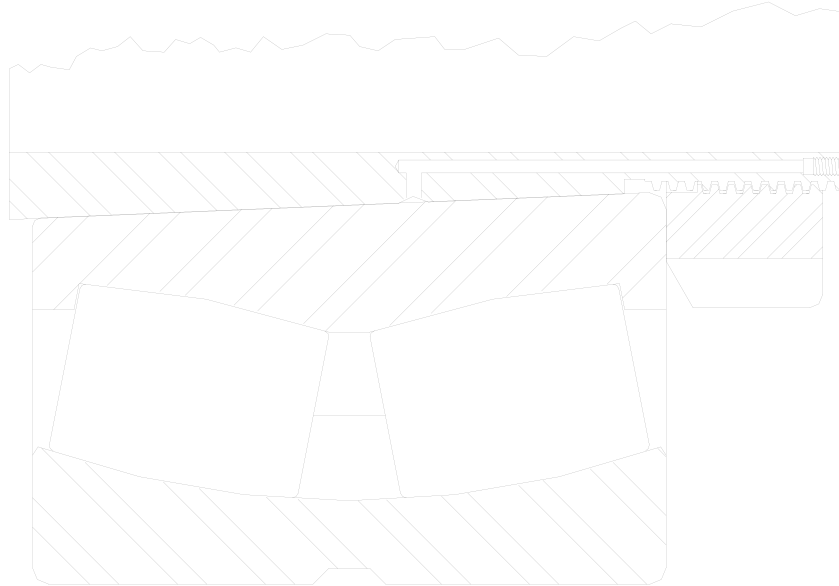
Shows a tapered adapter that has been modified for oil injection. Oil injection facilitates the dismounting of the bearing. The locknut is loosened, not completely removed, and oil is injected through the threaded connection. The pressurized oil travels through a circumferential groove machined into the sleeve's O.D. Oil distribution and pressure will overcome the frictional force between the bearing and sleeve allowing the bearing to slide off the adapter. American and Metric adapters can be ordered with hydraulic modification.
